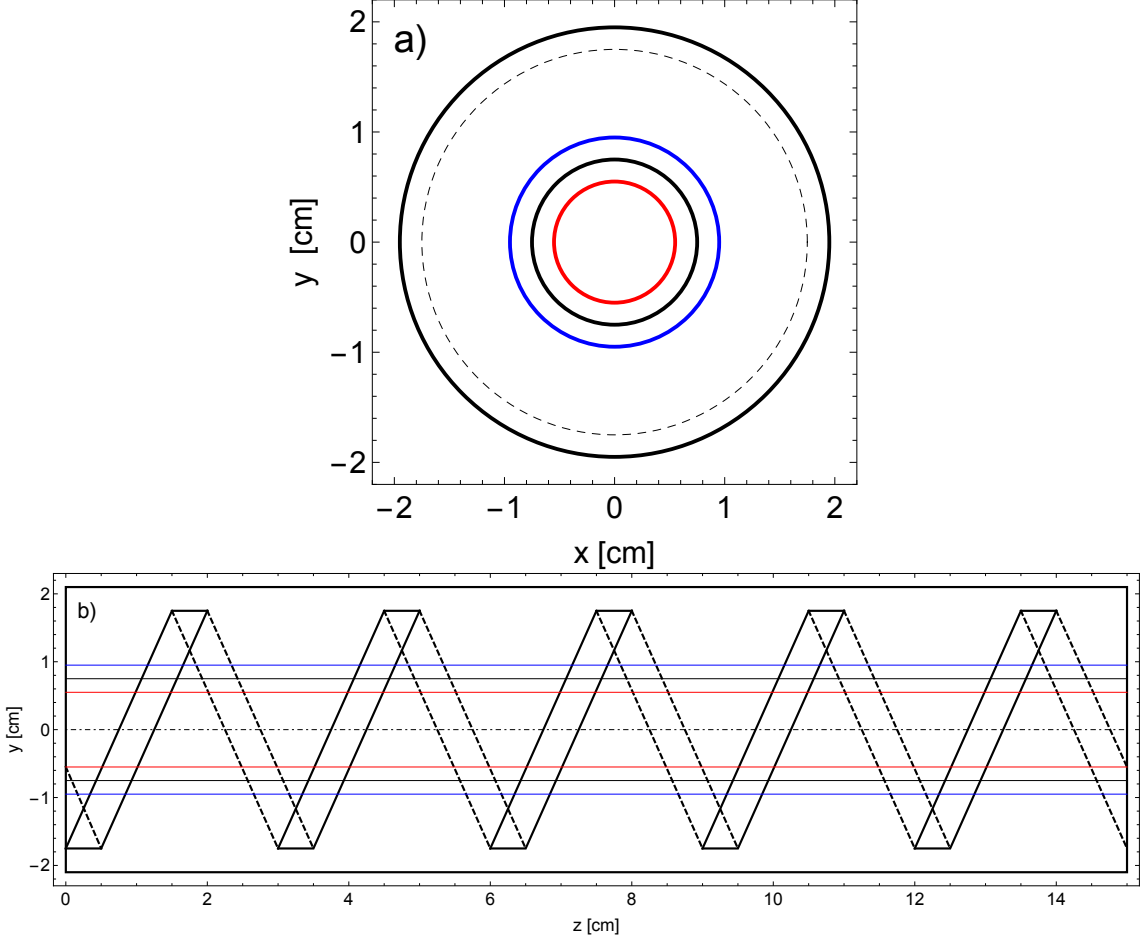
Screw conveyor schematics. Front view a): the external solid line represents the screw casing ($R_C = 1.95$ cm) while the dashed one the edge of the screw blade ($R_B = 1.75$ cm). The inner solid lines represent the 3 different screw shafts employed in the simulations (as explained further on): black ($R_S = 0.95$ cm), blue ($R_S = 1.15$ cm) and red ($R_S = 0.75$ cm). The blade section has been omitted for the sake of clarity. Side view b): the dot-dashed line represents the screw rotation axis, while the inner solid lines represents the 3 different shafts like in a).
